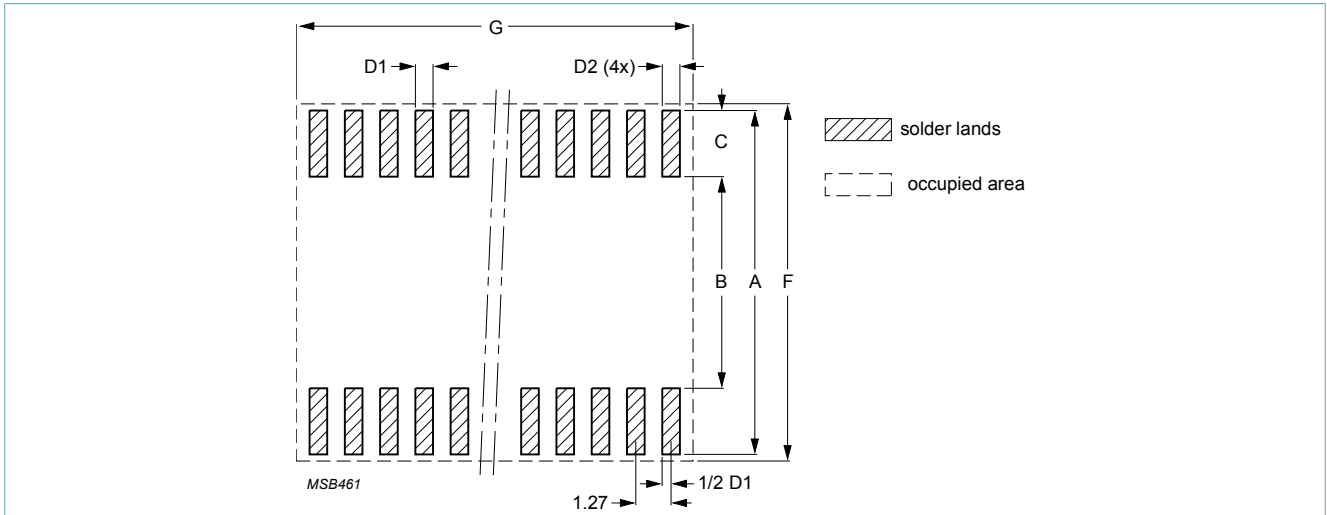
Reflow soldering footprint for SOJ40 (SOT449-1)
